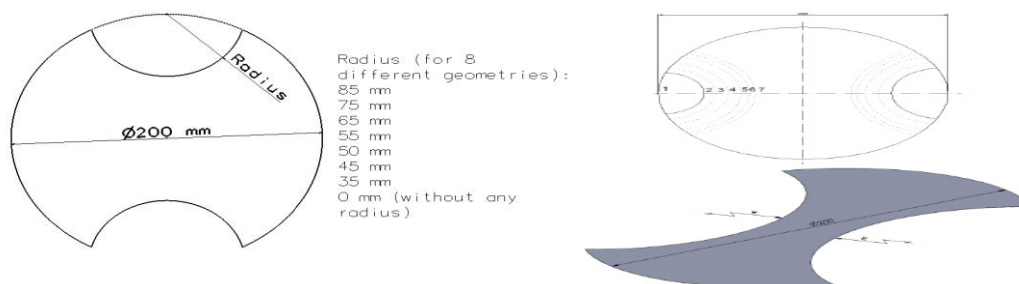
Dimensions and geometries of Nakajima test coupons used in tests
